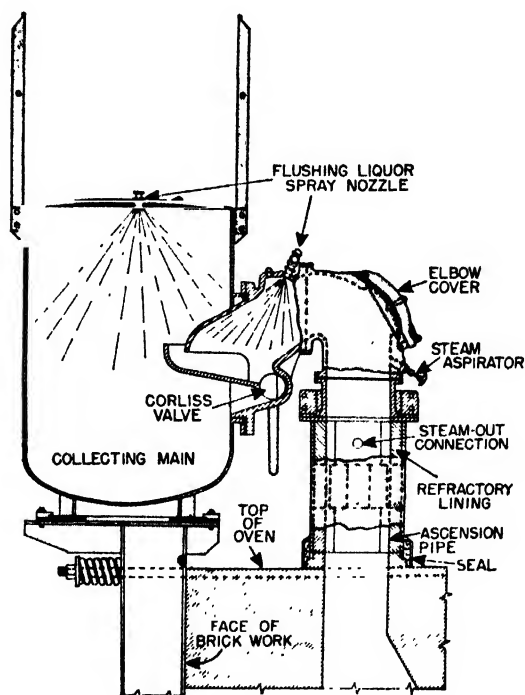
Wilputte design of water-sealed damper valve, incorporating a Corliss-type valve in the bottom of the damper box. (Courtesy, Wilputte Coke Oven Division, Allied Chemical and Dye Corp.)
